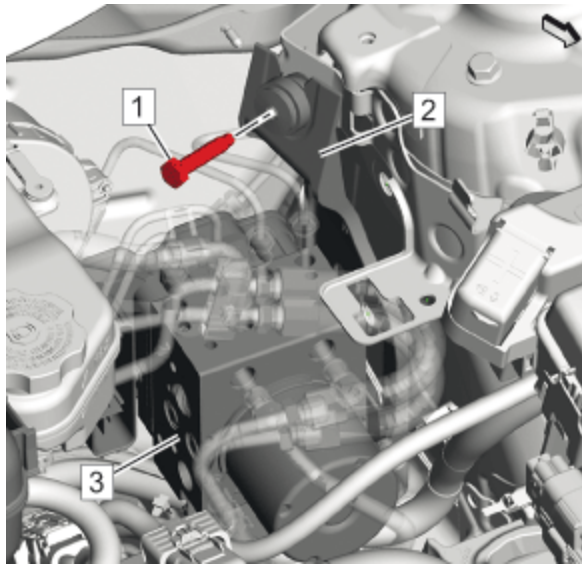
Brake Pressure Modulator Valve, Bracket And Bolt
